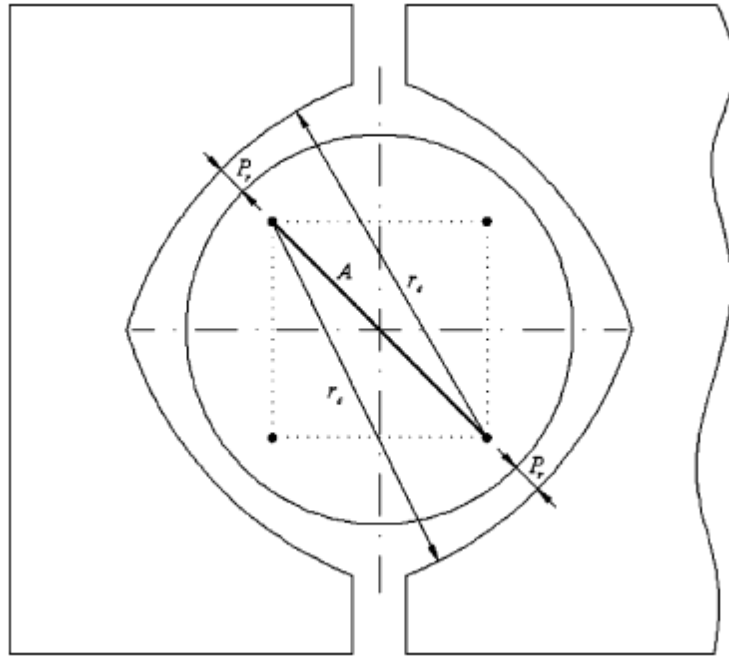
Dimensional parameters for clearance between the races and ball bearings [6]
